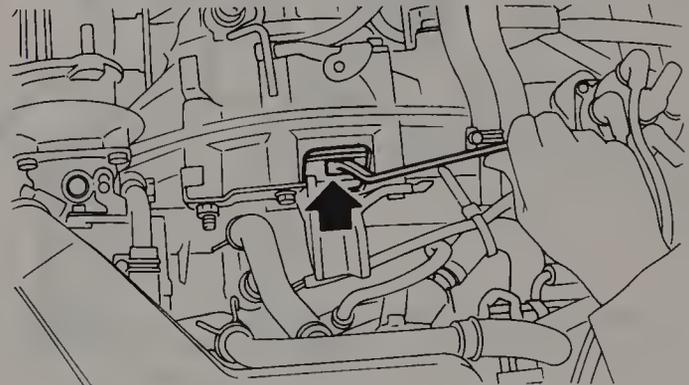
Disconnect the torque converter from the driveplate through the timing mark hole in the bellhousing (Sec 5)
